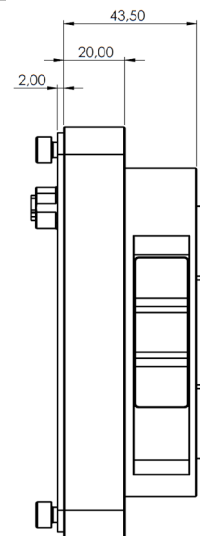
BioProTT™ FlowSU System - Technical Drawing: Side
